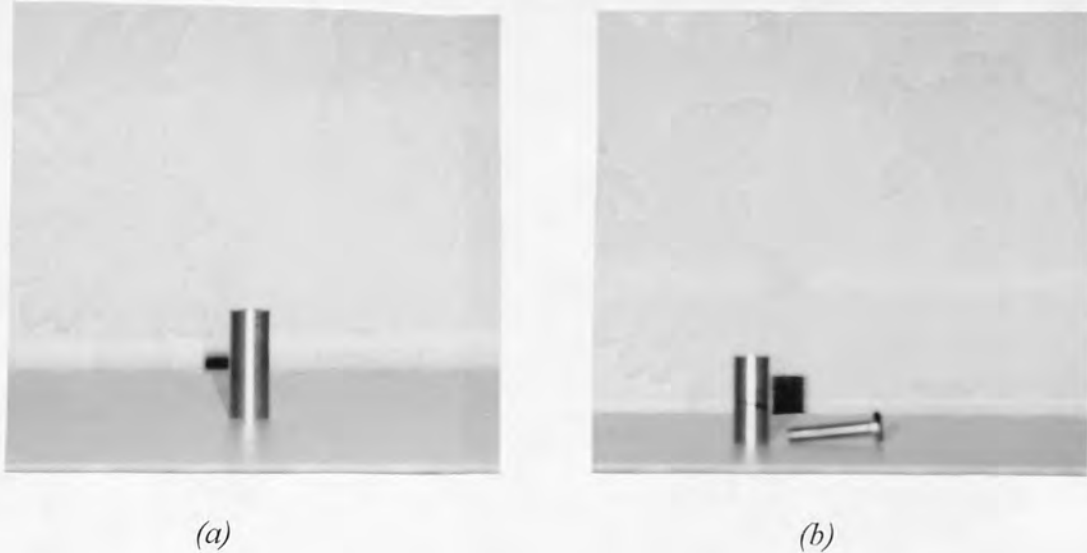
Test pieces used for (a) creep testing (b) load-relaxation testing with screw.
